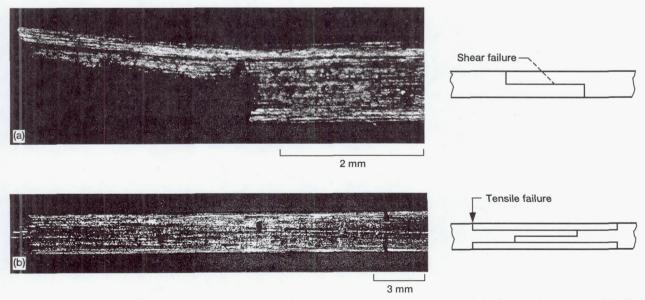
Failure mode of simulated lap-butt joints in W-Cu composite sheet. Edge views of fracture in four-ply base material with and without doublers. (a) Specimen 9-1. Shear failure (no doublers) through Cu matrix. Joint overlap, 3 mm; 8° joint rotation. (b) Specimen 17-1. Tensile failure in base material at edge of doublers. Joint overlap, 6 mm; no joint rotation.
